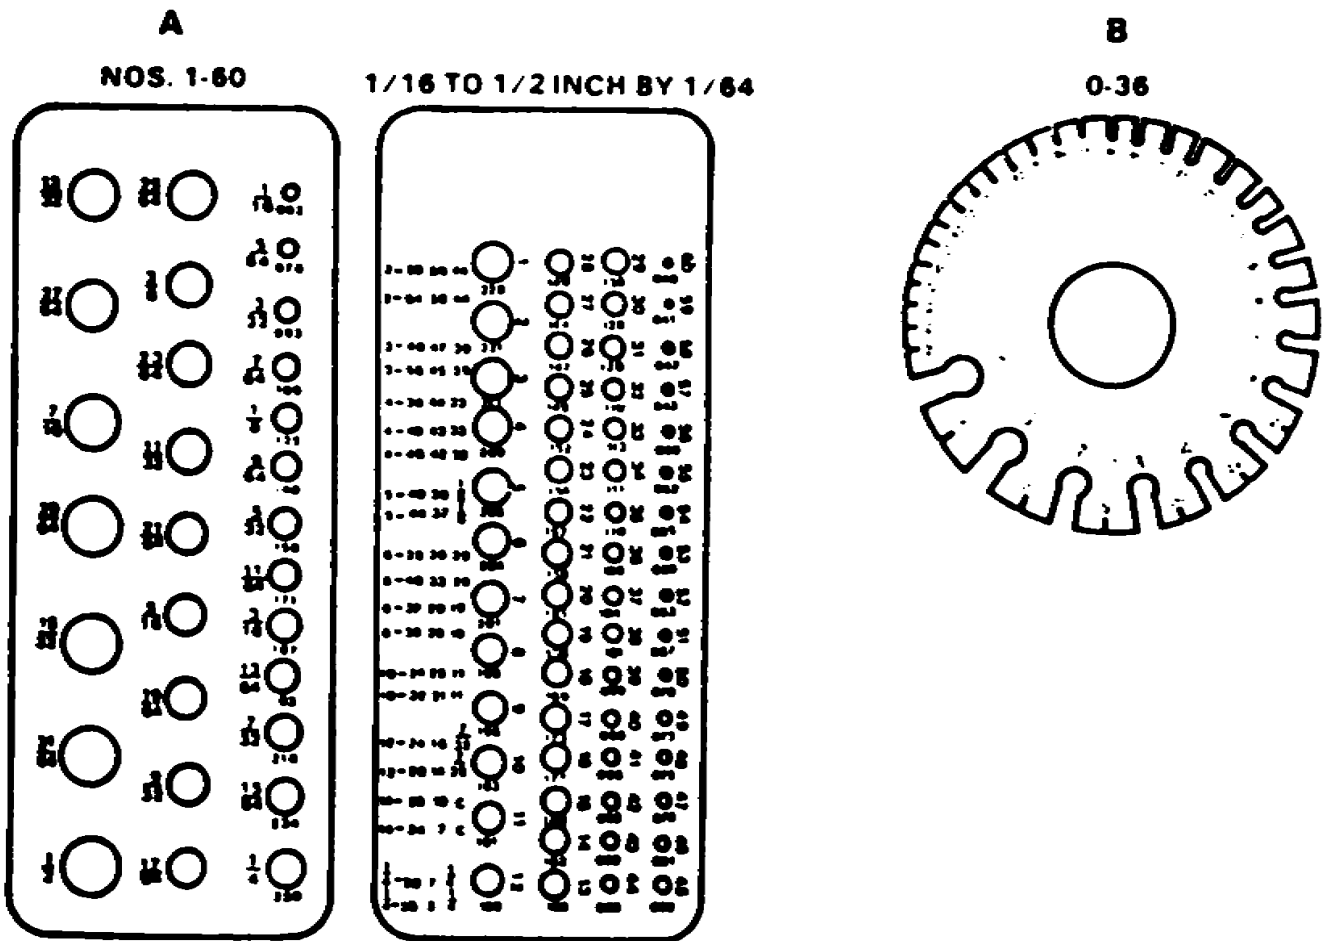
WIRE AND DRILL GAGES (PARTS A AND B)
